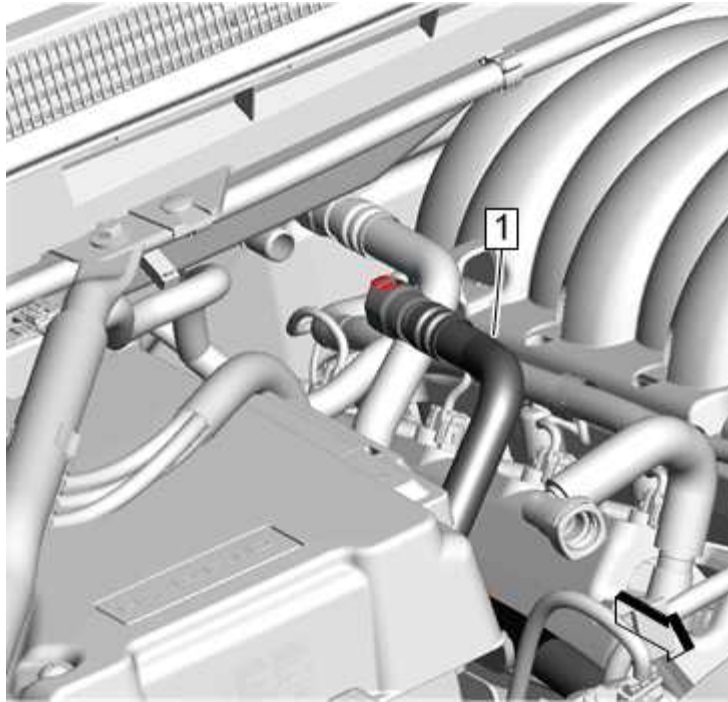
Heater Outlet Hose And Heater Core Outlet Tube
